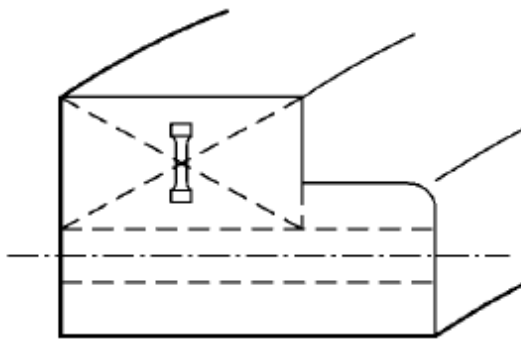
Location and orientation of tensile specimens (1 specimen from the location)
